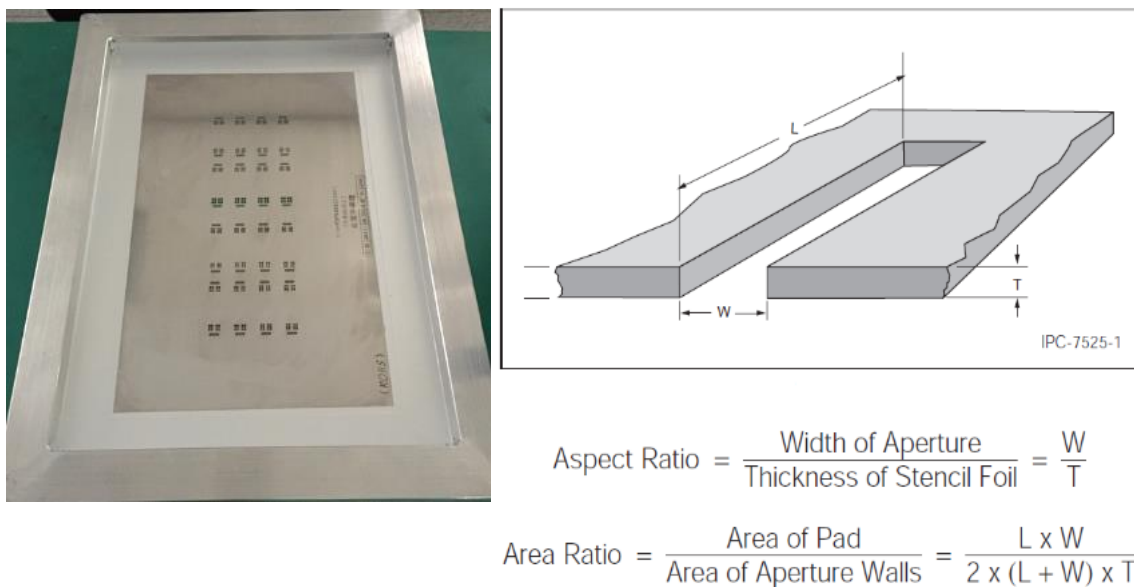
Overview of solder stencil and cross sectional view of a stencil aperture
